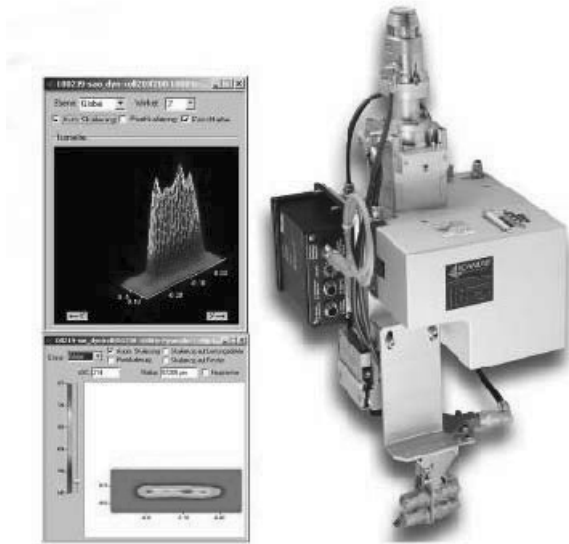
Integrated laser tool, developed in the WELDIMA-project
